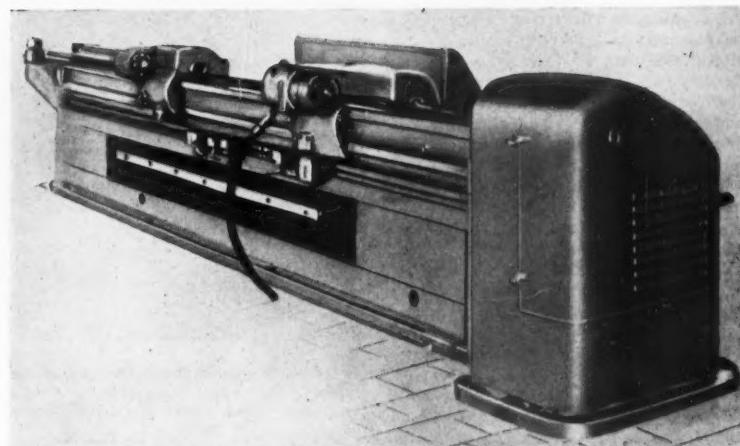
The basic version of the Carlstedt (Swedish) deep-hole boring machine. The smallest version can be used for boring holes $\frac{1}{4}$ in diameter
